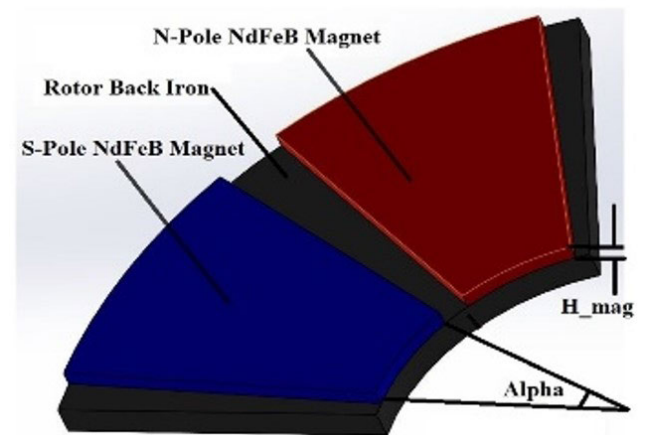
The rotor parameters of ring winding AFPD motor [97].
